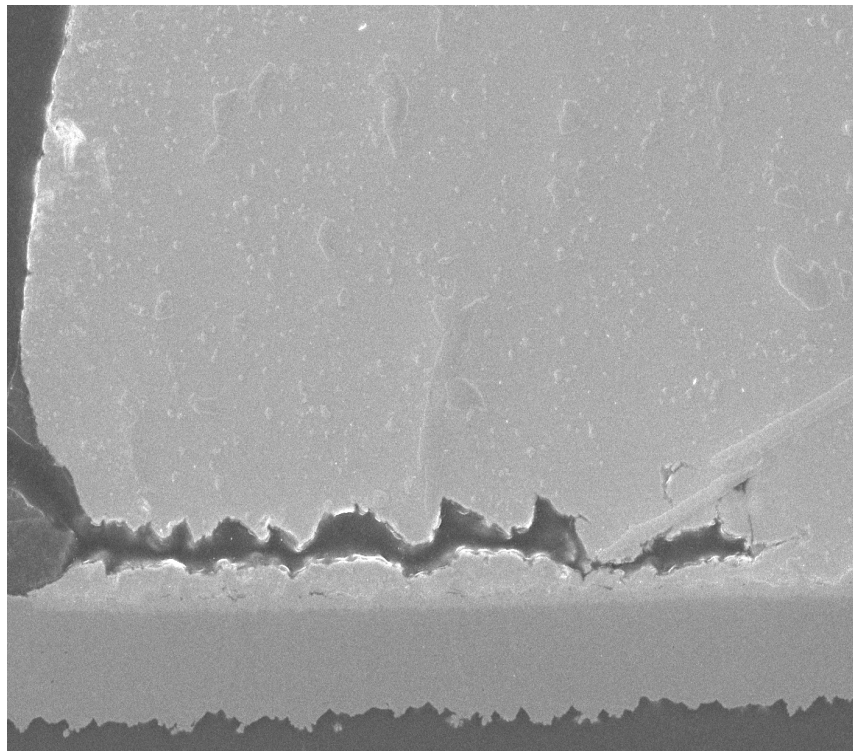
Typical Solder Joint Failure in 16mm Flex BGA
